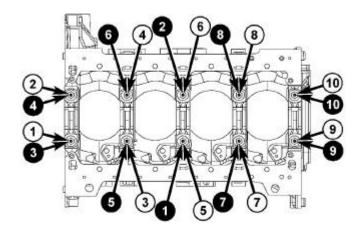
Main Bearing Caps Courtesy of CHRYSLER LLC
